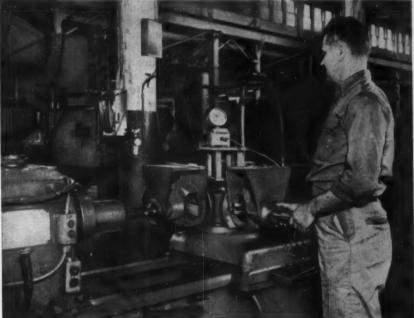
Pump brackets are fixture-mounted on the tool turret of this lathe for boring. Micrometer adjustment on boring-bar facilitates tool setting and air gage on turret allows rapid inprocess inspection.
